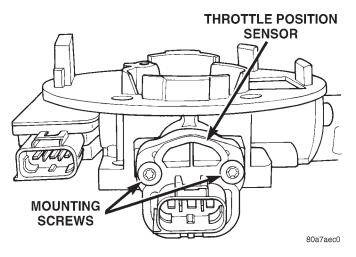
TPS Mounting Bolts—5.2L/5.9L Engines— Typical
